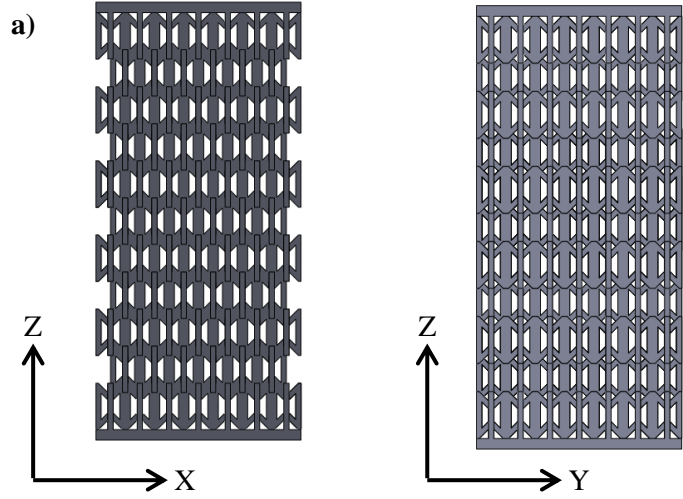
a) auxetic and b) conventional 3D printed cell dimensions.
